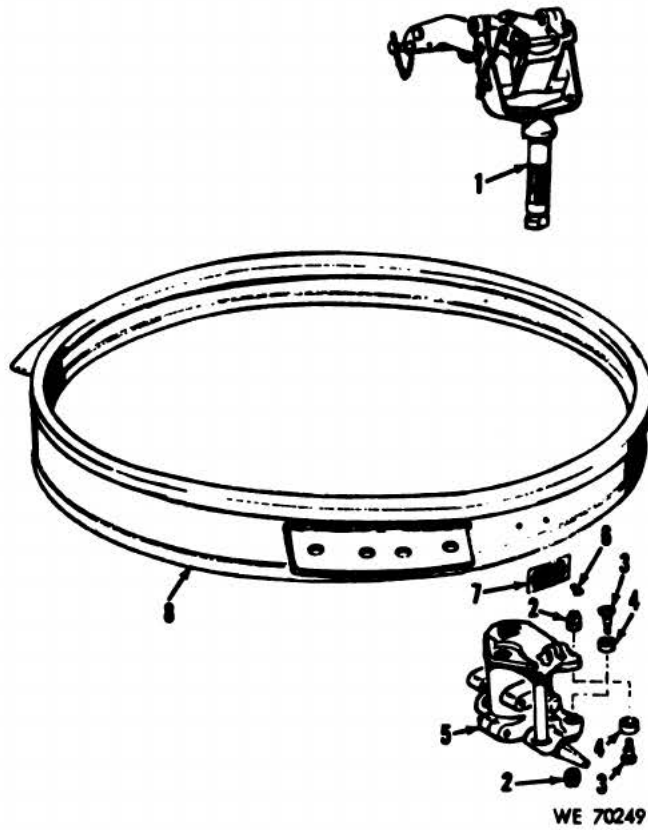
Mount, gun, ring, M49-6554500—partially exploded view.
